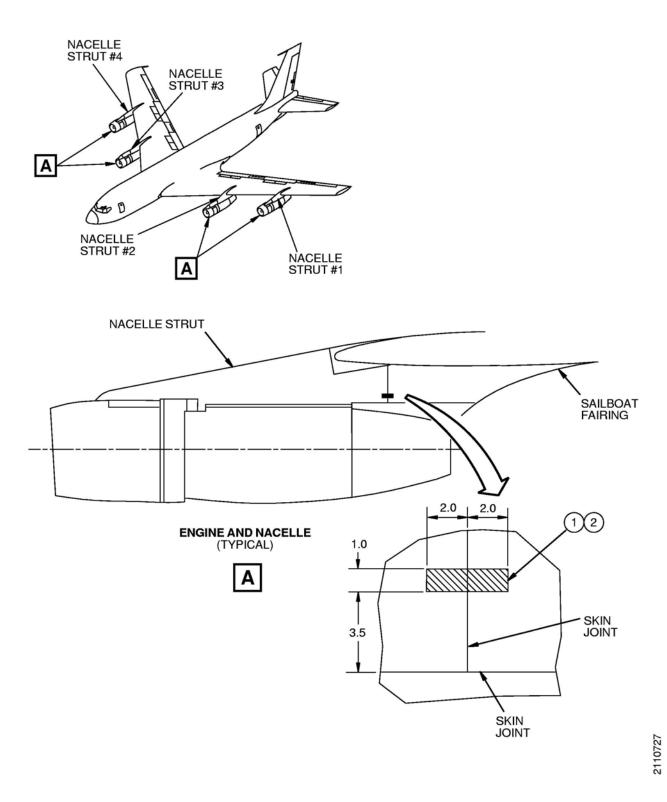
NACELLE STRUT AND SAILBOAT FAIRING DROOP STRIPE APPLICATION (SHEET 1 OF 2)
